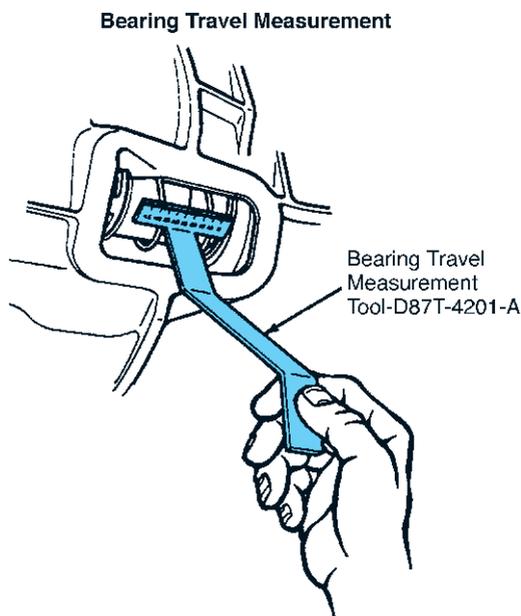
If the hydraulic clutch problem is failure to release, check for proper bearing travel. Insufficient bearing travel indicates a faulty hydraulic system. (Courtesy of Ford Motor Company)
